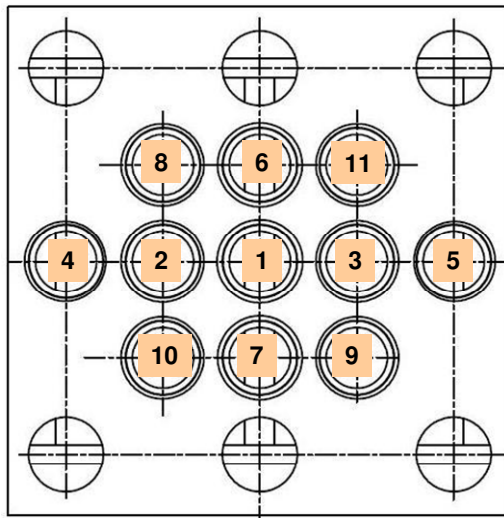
Multi-nozzle Mockup Nozzle Welding Sequence
